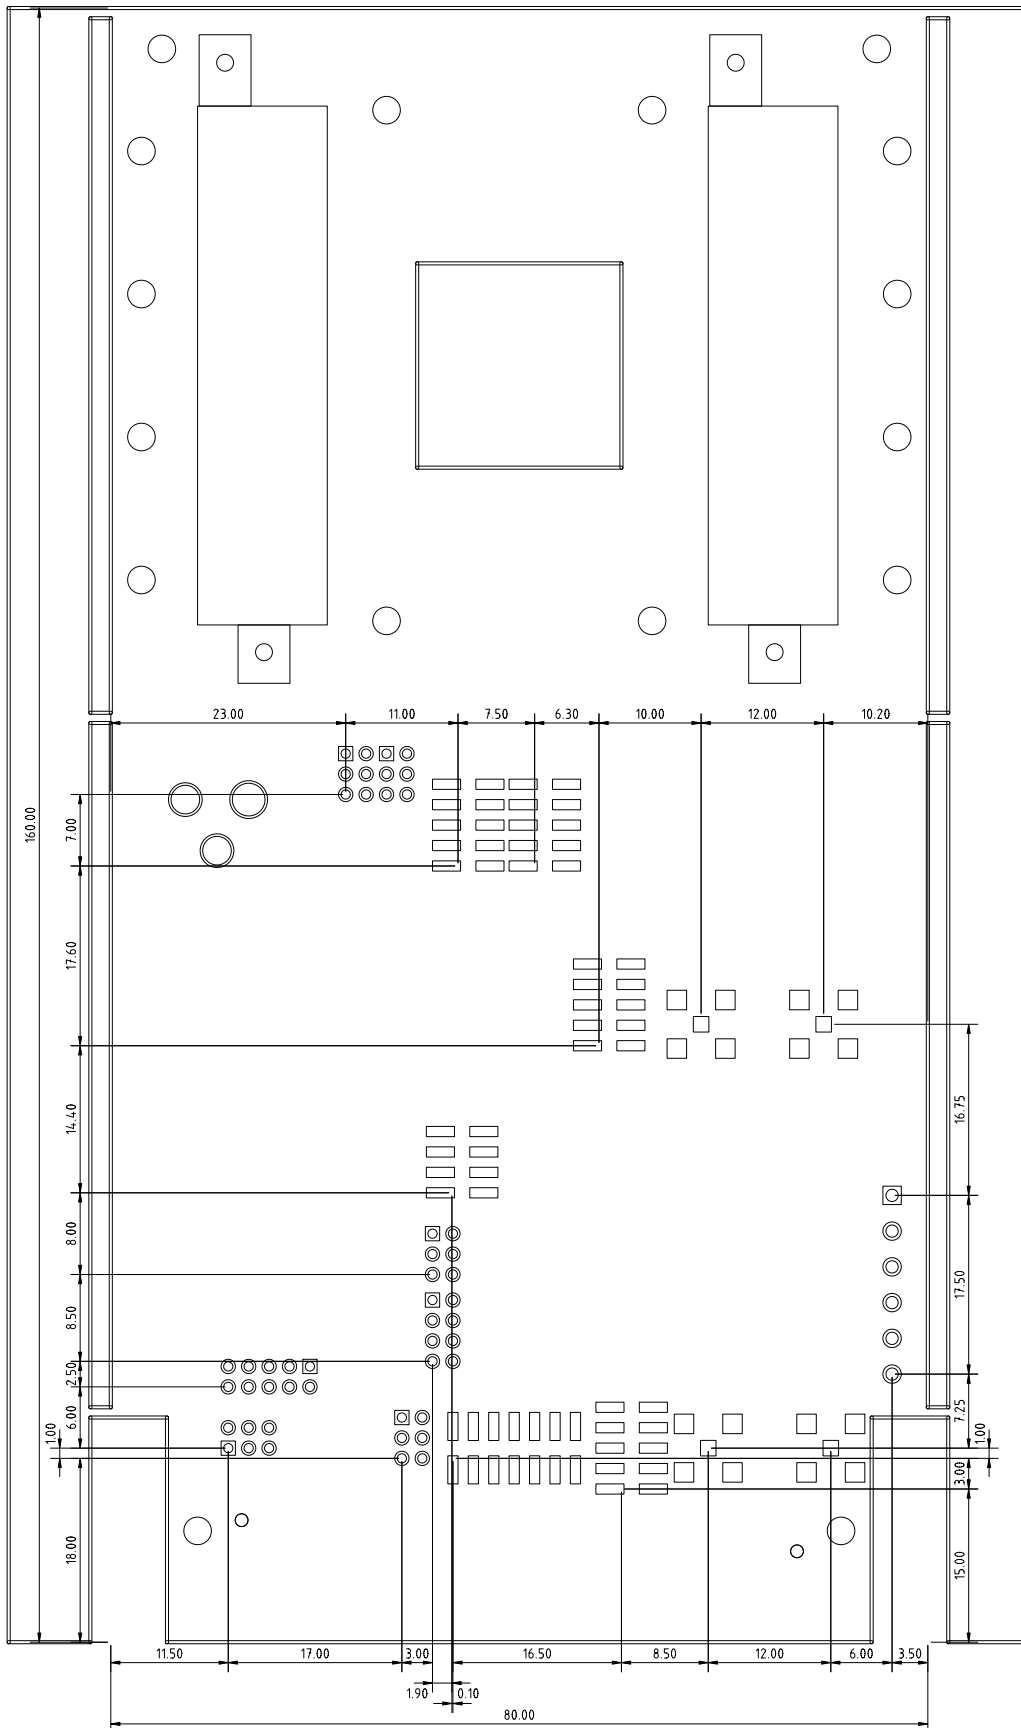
Motherboard pin header positions. Pin pitch is 2mm except for the screw terminal J23 where it is 3.5mm.
